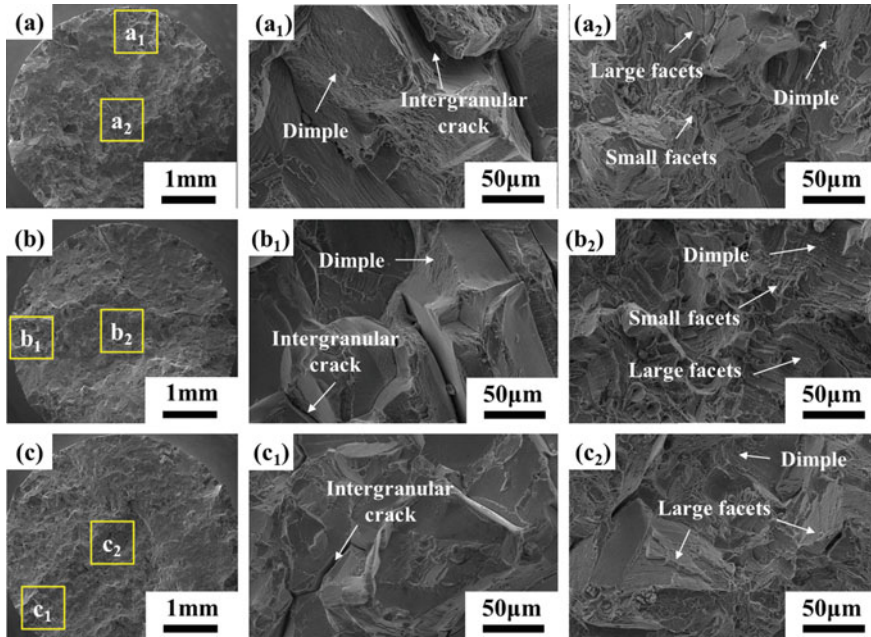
Tensile fracture morphology of samples tested at 760 °C. a–a₂ 0#; b–b₂ PT3#; c–c₂ PT6#
